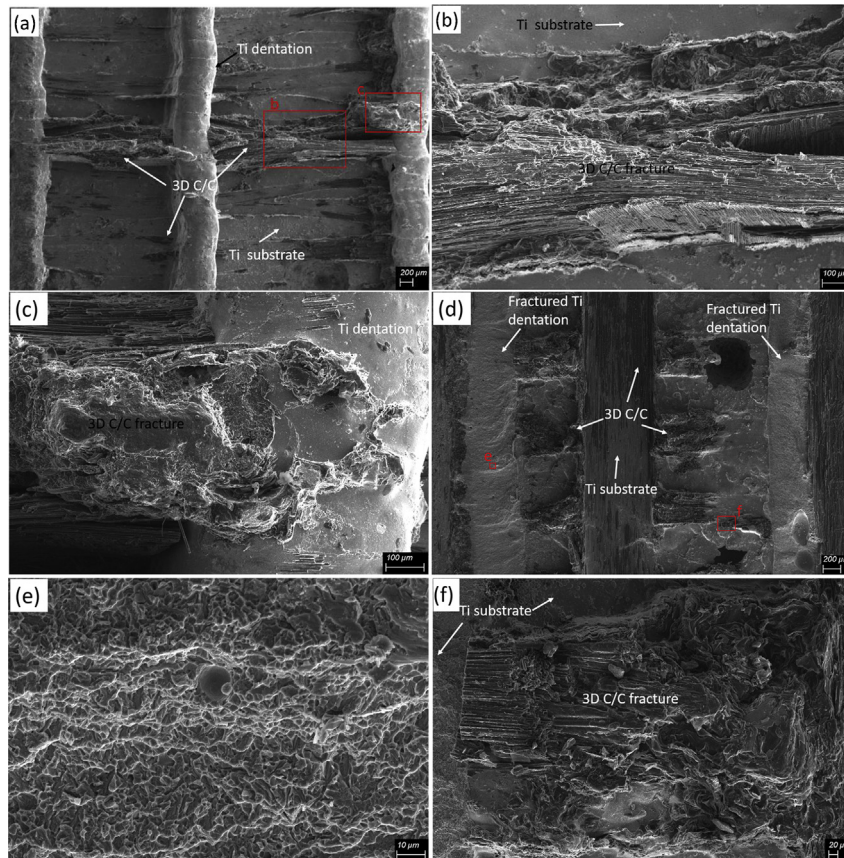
Typical fracture surfaces of the 3D C/C composite-Ti6Al4V joints on the Ti6Al4V sides for joints with groove depths of (a–c) 1 mm and (d–f) 3 mm.
